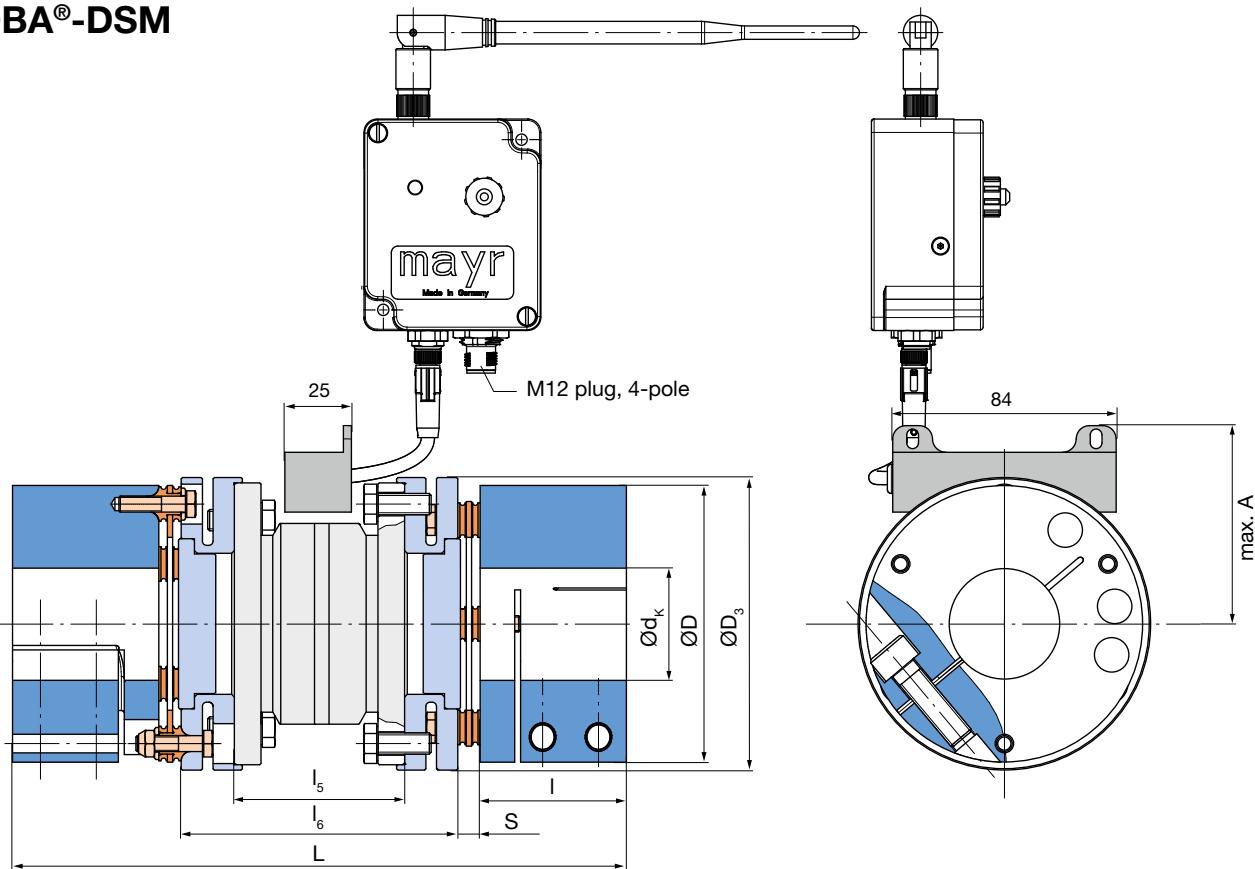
Type 971.555 (for other mounting variants, see pages 7 – 9)
